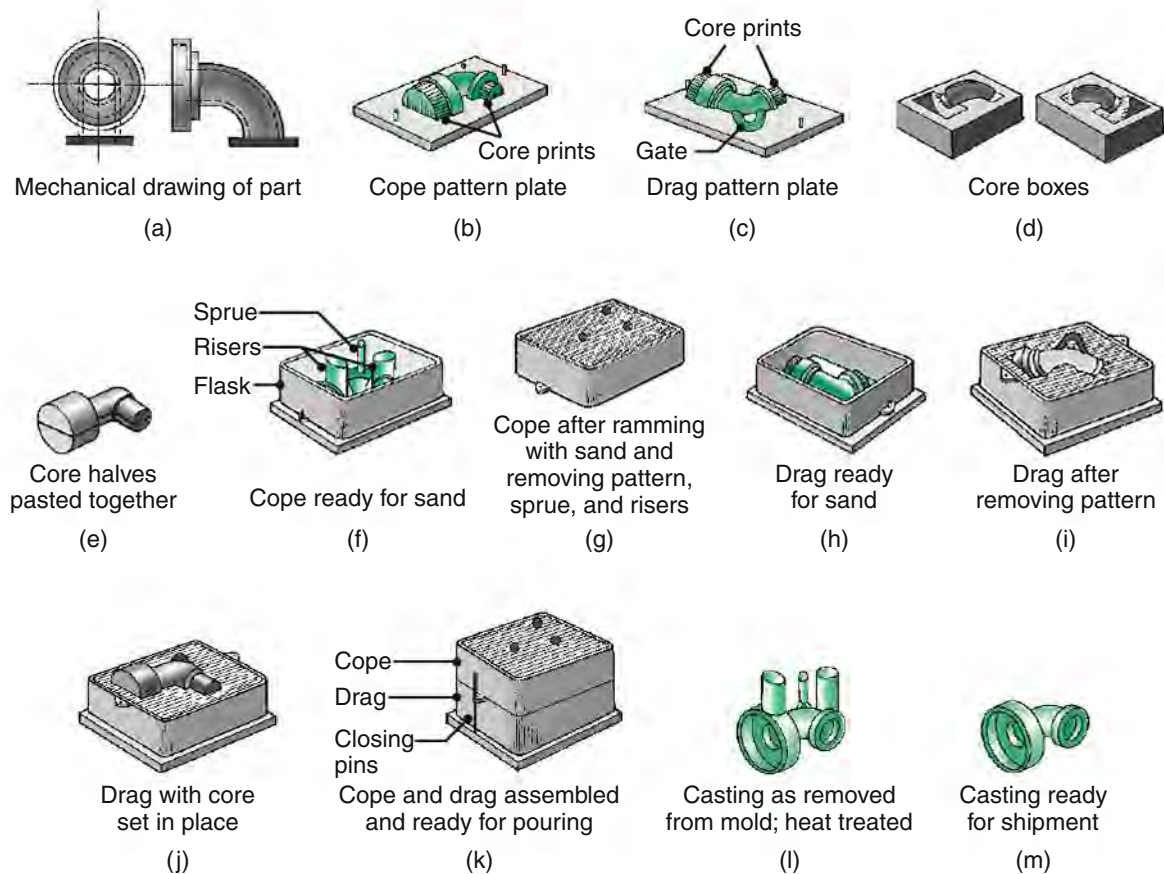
Schematic illustration of the sequence of operations for sand casting. (a) A mechanical drawing of the part is used to generate a design for the pattern. Considerations such as part shrinkage and draft must be built into the drawing. (b–c) Patterns have been mounted on plates equipped with pins for alignment. Note the presence of core prints designed to hold the core in place. (d–e) Core boxes produce core halves, which are pasted together. The cores will be used to produce the hollow area of the part shown in (a). (f) The cope half of the mold is assembled by securing the cope pattern plate to the flask with aligning pins and attaching inserts to form the sprue and risers. (g) The flask is rammed with sand, and the plate and inserts are removed. (h) The drag half is produced in a similar manner with the pattern inserted. A bottom board is placed below the drag and aligned with pins. (i) The pattern, flask, and bottom board are inverted, and the pattern is withdrawn, leaving the appropriate imprint. (j) The core is set in place within the drag cavity. (k) The mold is closed by placing the cope on top of the drag and securing the assembly with pins. The flasks are then subjected to pressure to counteract buoyant forces in the liquid, which might lift the cope. (l) After the metal solidifies, the casting is removed from the mold. (m) The sprue and risers are cut off and recycled, and the casting is cleaned, inspected, and heat treated (when necessary). *Source:* Courtesy of Steel Founders' Society of America.
